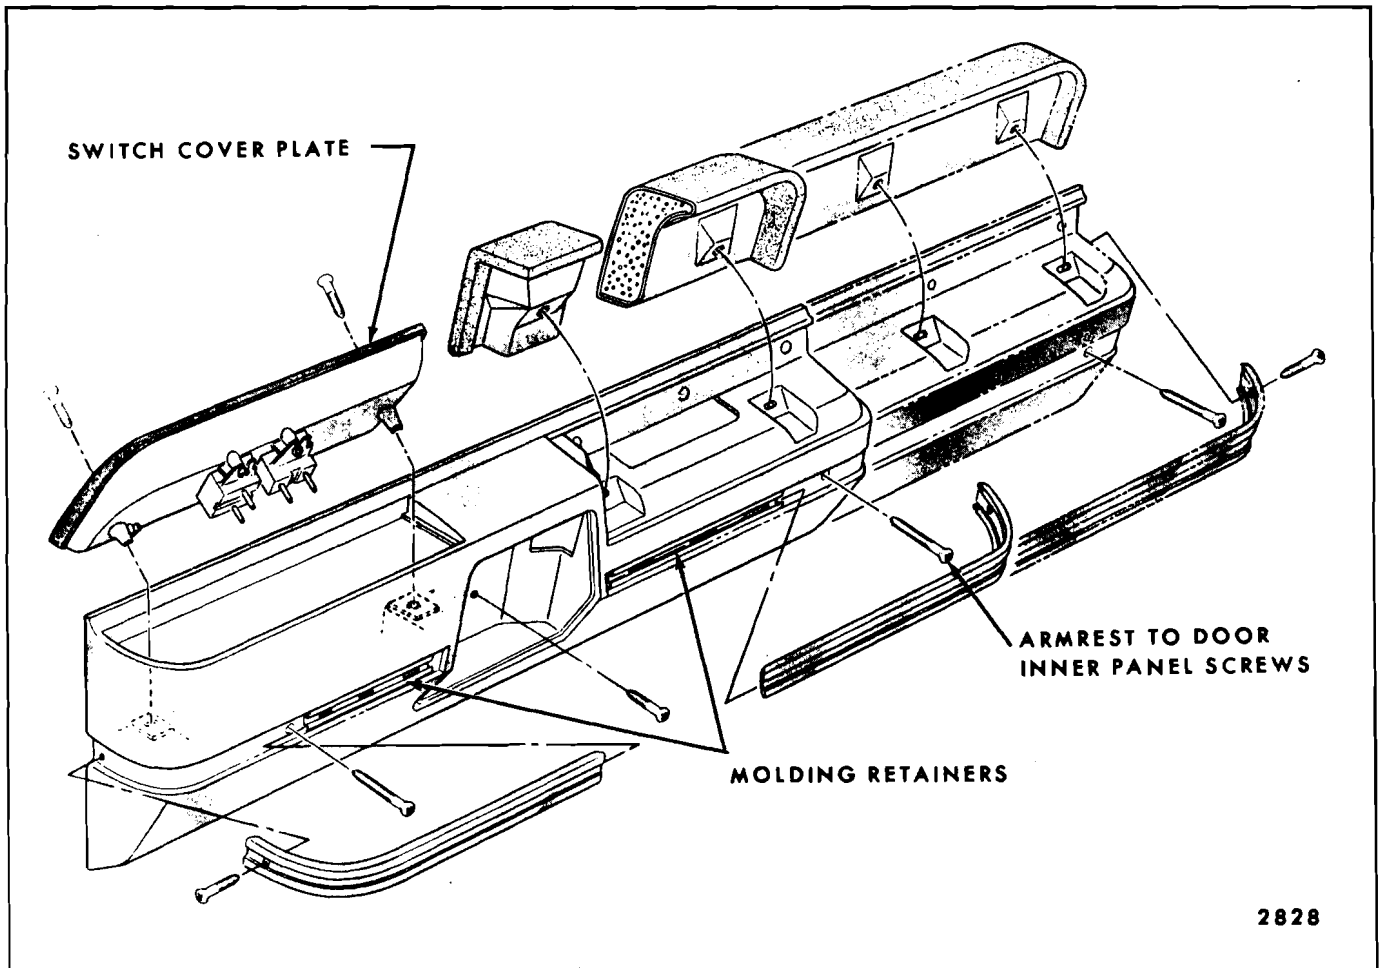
Door Arm Rest Build-Up and Attachments - Buick and Oldsmobile Styles
